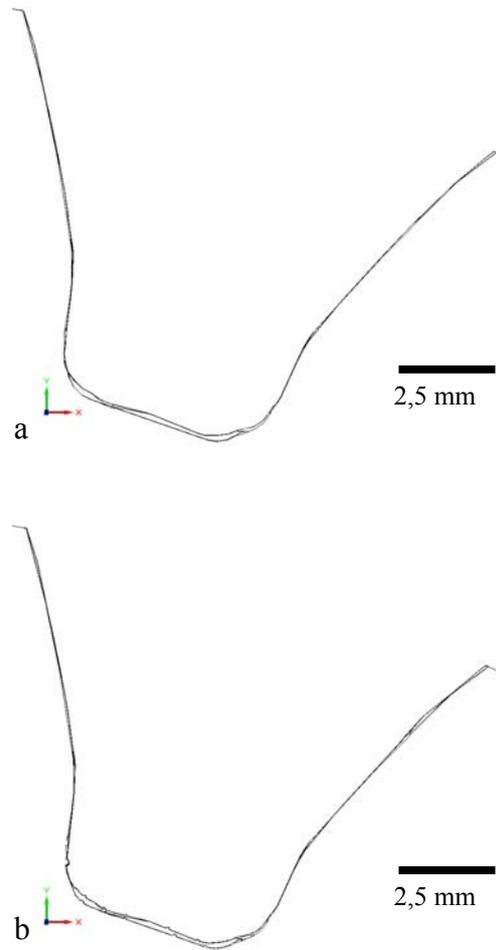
The generated surfaces using (a) a hob without surface damage and (b) a hob with surface damage.
